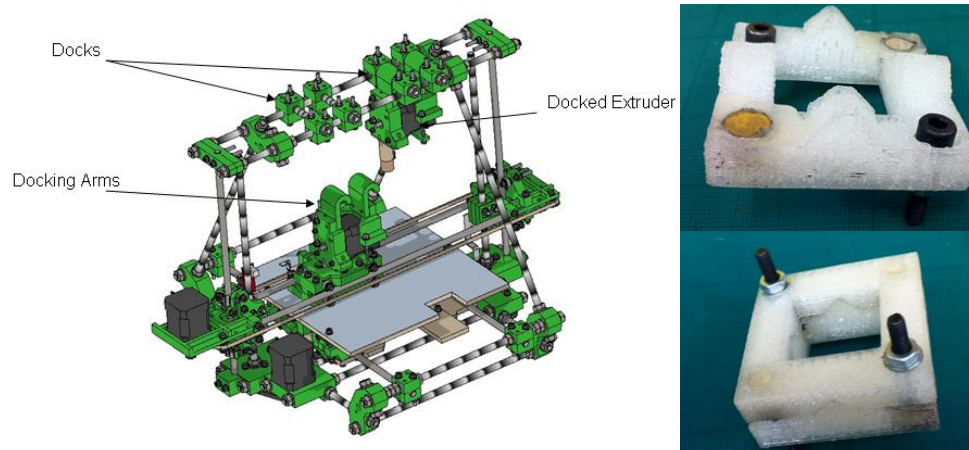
Head changer concept 1(left) magnetic carriage, undocked (upper right) and docked (lower right)
